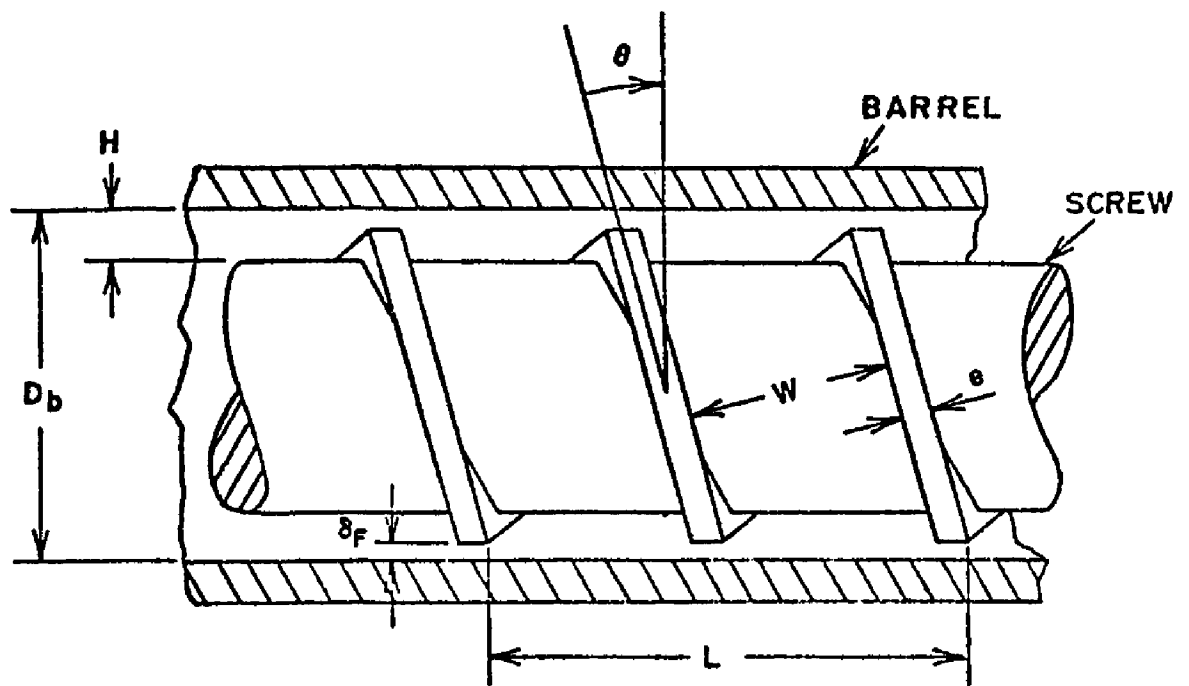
Geometry of a Double Flighted Single Screw Extruder (Cut Away View)
